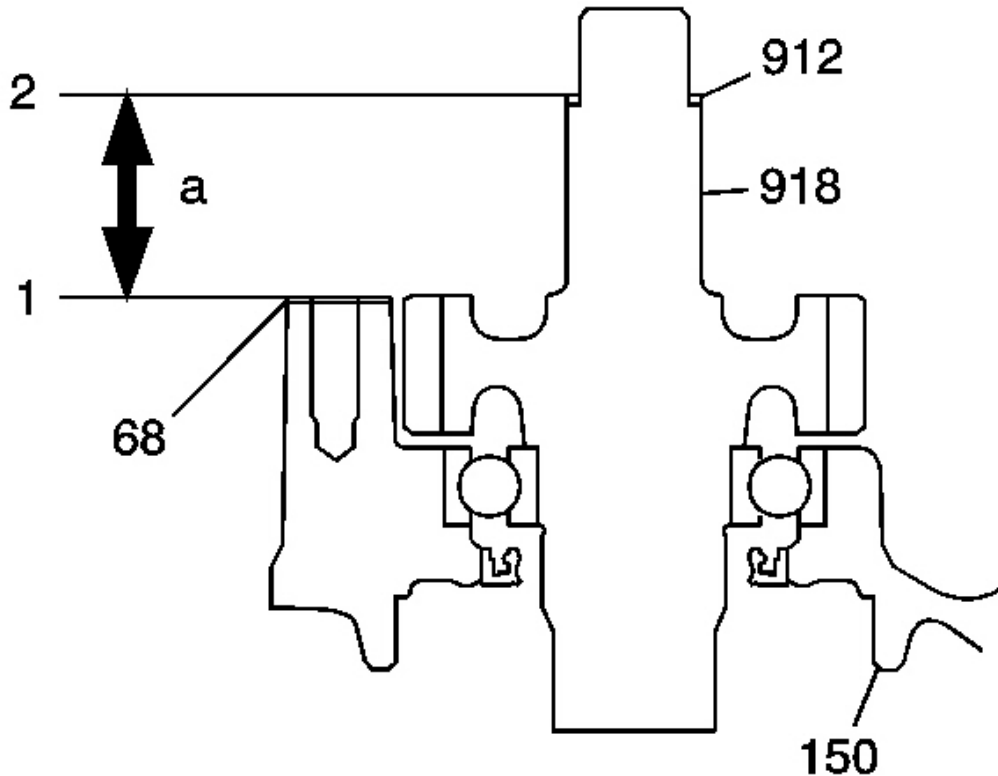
Measuring The Height From Torque Converter Housing Gasket & Top Of Transfer Case Input Gear Selective Shim
